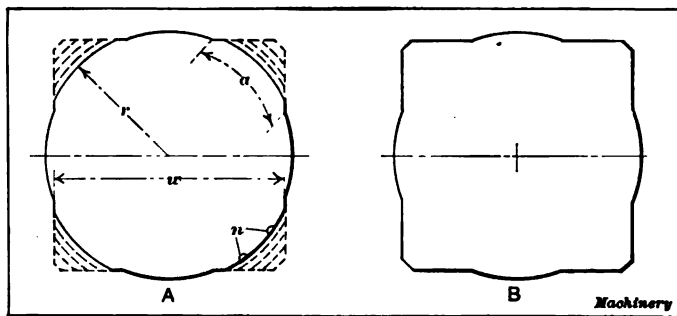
Diagram illustrating Distribution of Tooth Cuts in broaching a Square Hole
